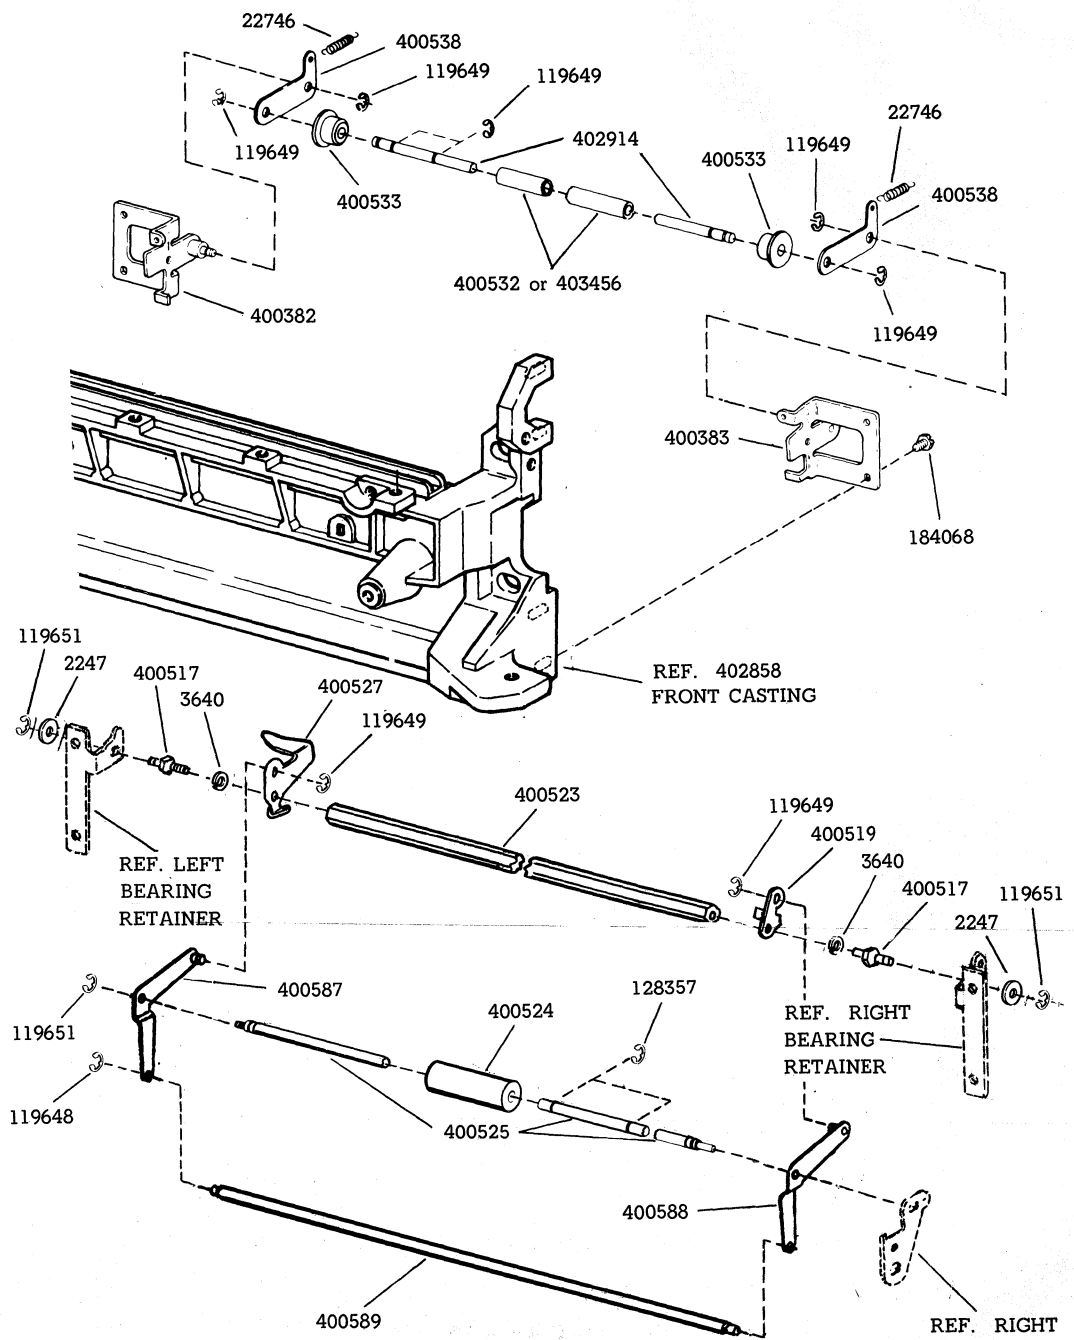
Front Casting Assembly (Friction Feed 40P101 Late Design) (Cont.)
